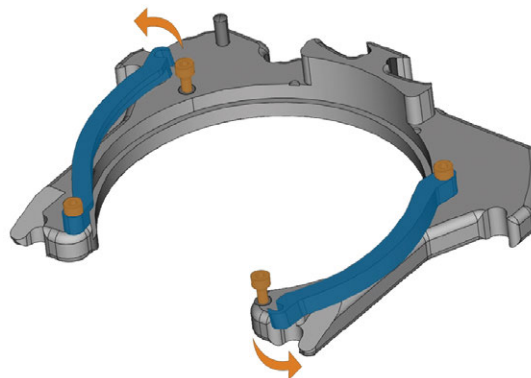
OPENING THE FIXING BRACKETS OF THE BLANK FRAME
